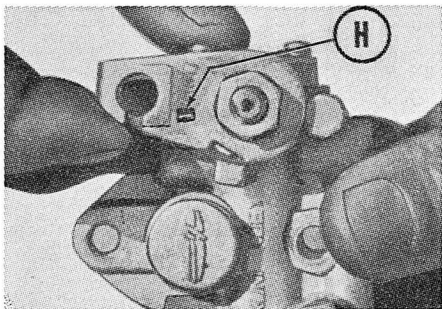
View of the oil pump adjustment hole aligned with the mark on pump body. Hole should align with mark when the throttle is in maximum speed position.
